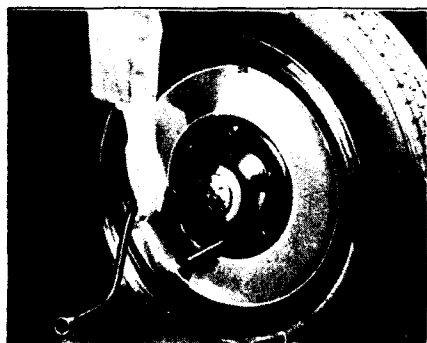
In mounting disc wheels, use the rear end of the brace wrench as a pilot bar.
